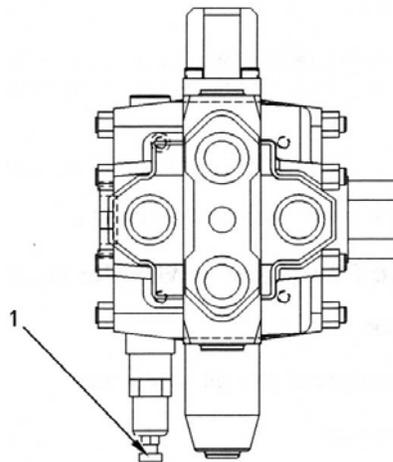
Counterweight control valve {6}. (1) Relief valve adjustment screw.
